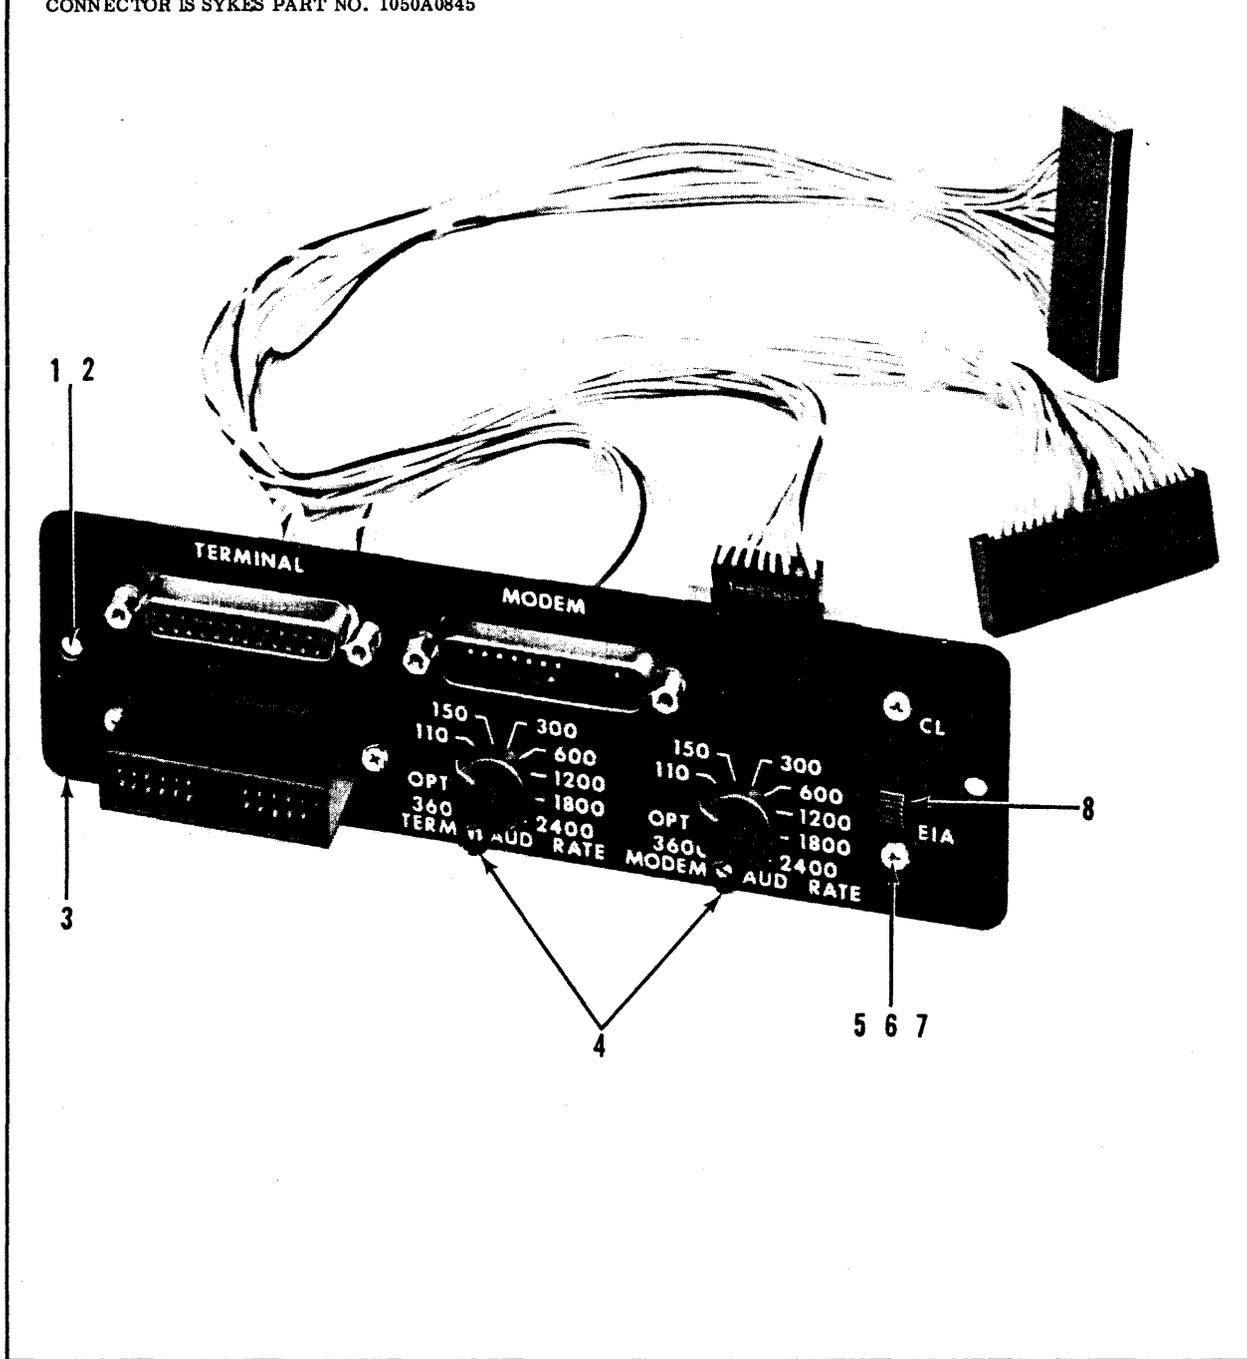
EIA INTERFACE I/O PANEL ASSEMBLY
